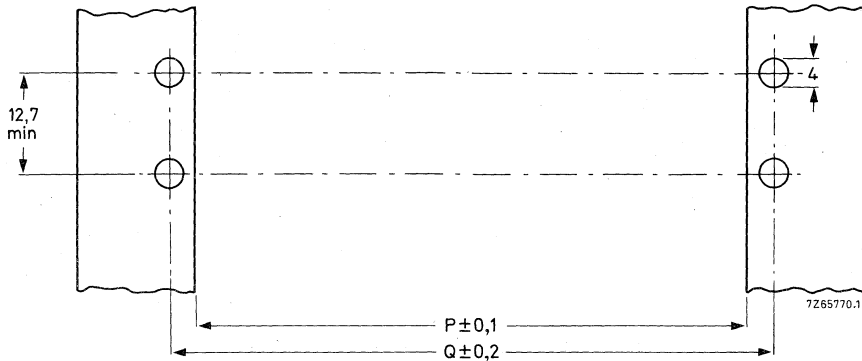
Piercing diagram for rail mounting; see Table 3 for dimensions P and Q.
